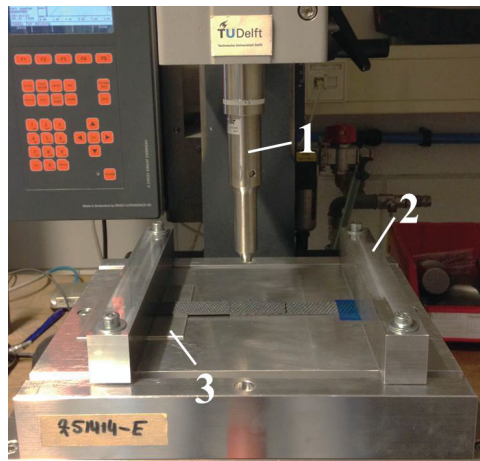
Ultrasonic welder and welding jig used in this study. 1: sonotrode, 2: bar clamp, 3: supporting plate for the upper adherend.
